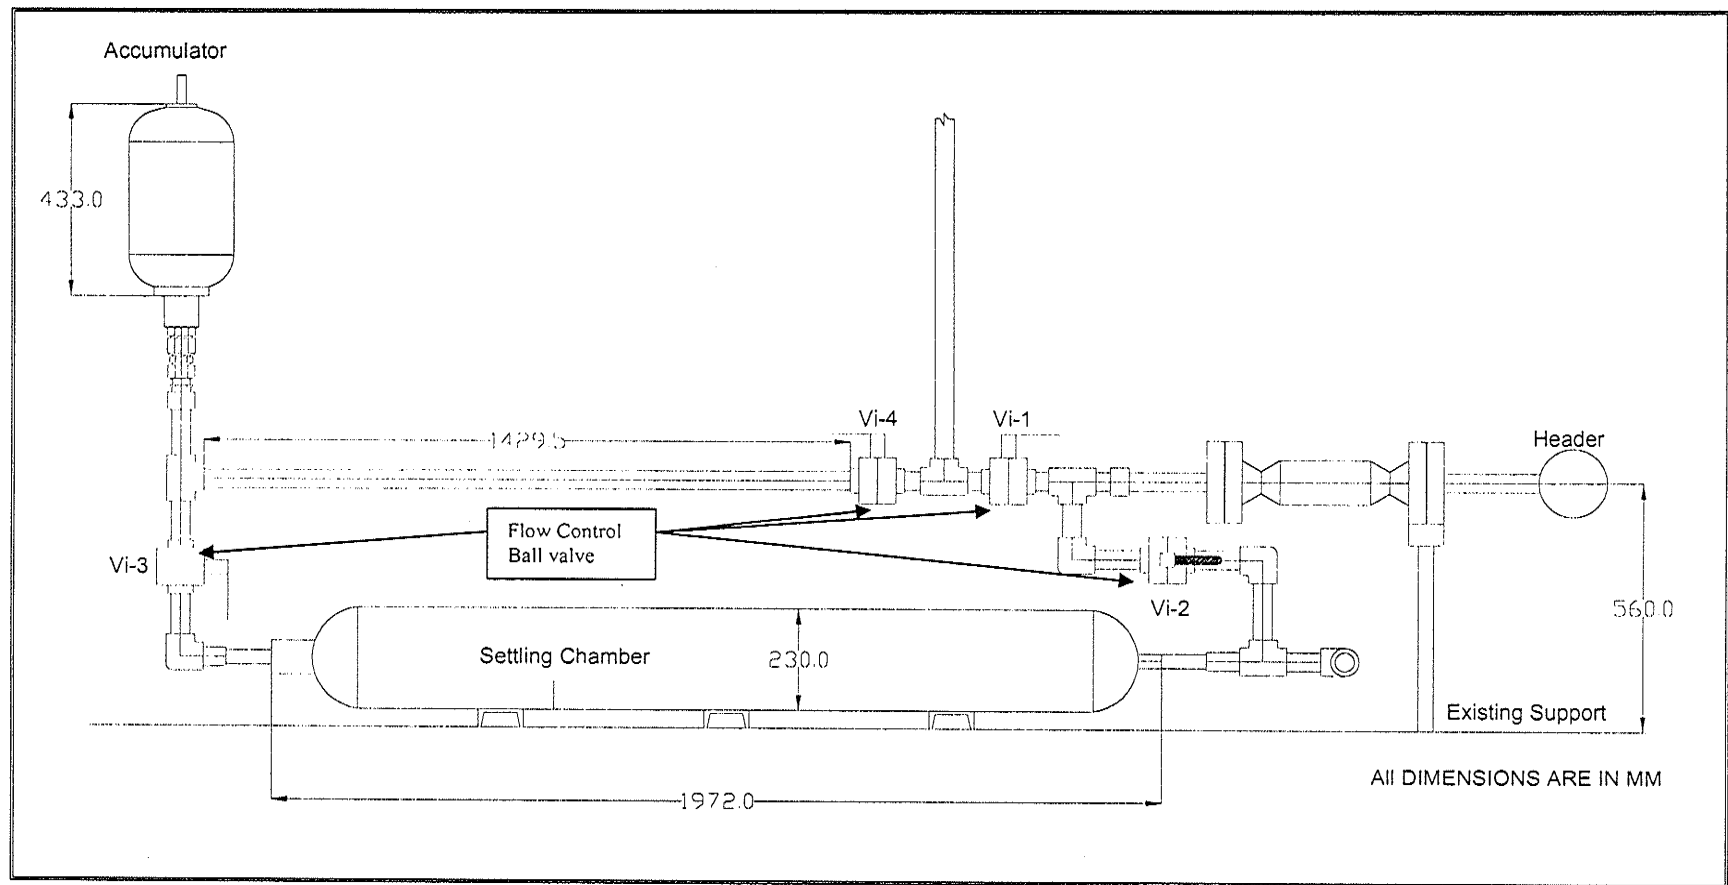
Schematic drawing showing the settling chamber assembly.
